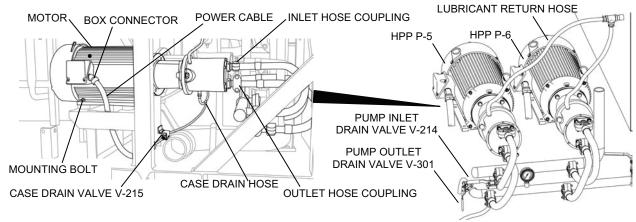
Metal-Body High-Pressure Pump/Motor Assembly Removal.
